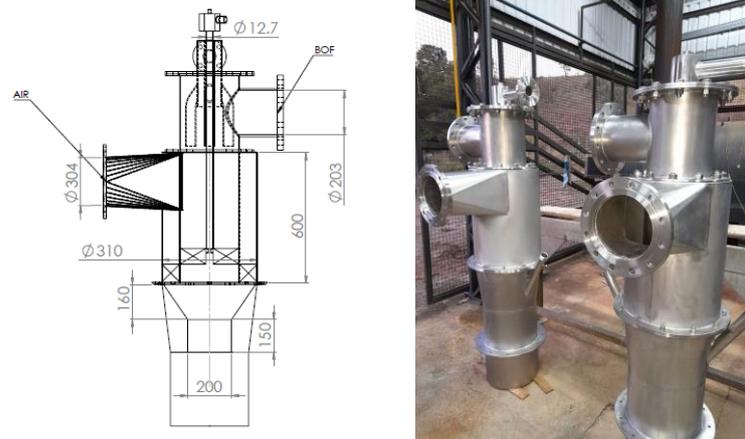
BOF burner for heating steelworks ladles. The dimensions are in millimeter.
